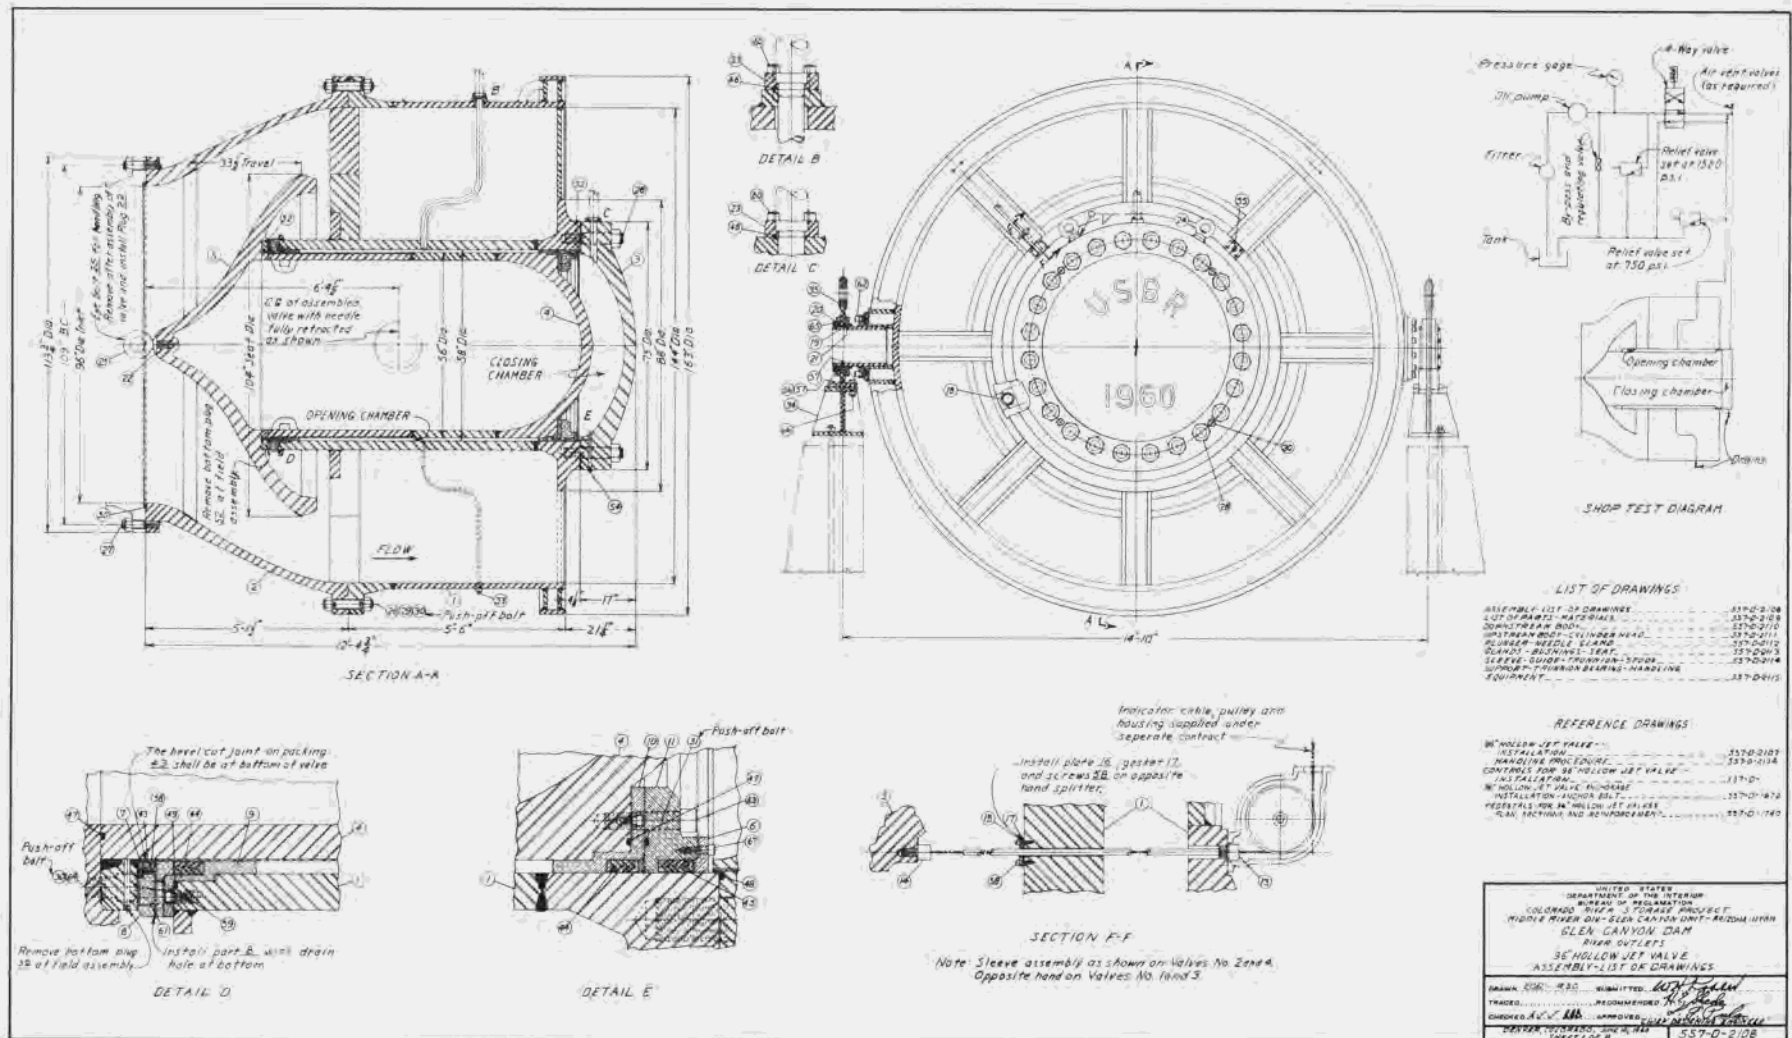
River outlets 96-inch hollow-jet valve—Assembly.
